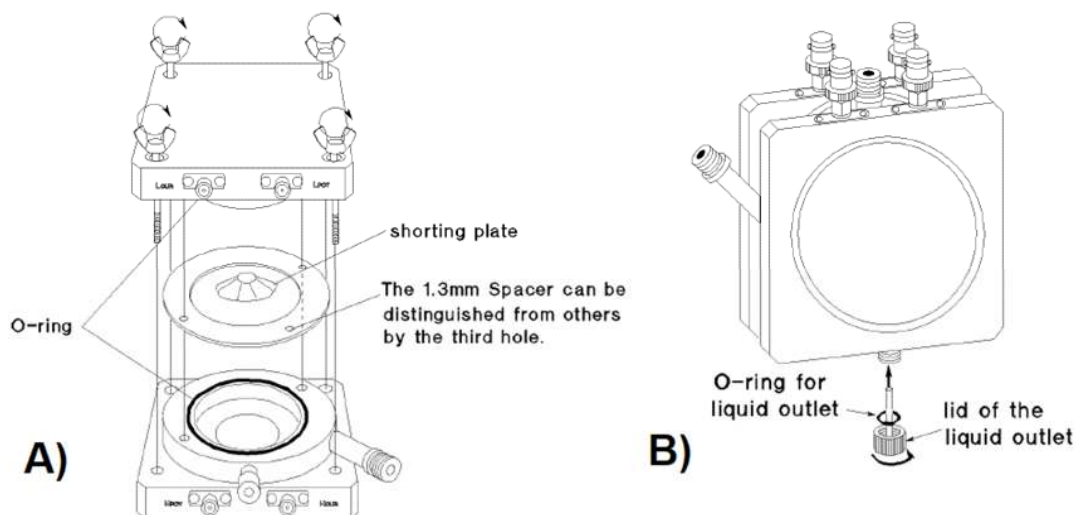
Keysight 16452A liquid test fixture. (A) Assembly detail (Short compensation) and (B) Assembled liquid test fixture. Reproduced with permission, courtesy of ©Keysight Technologies, Inc., 1994–2019.
